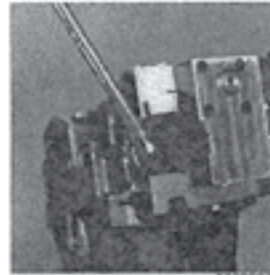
Remove E1•E2 or F1•F2 Control Solenoid
